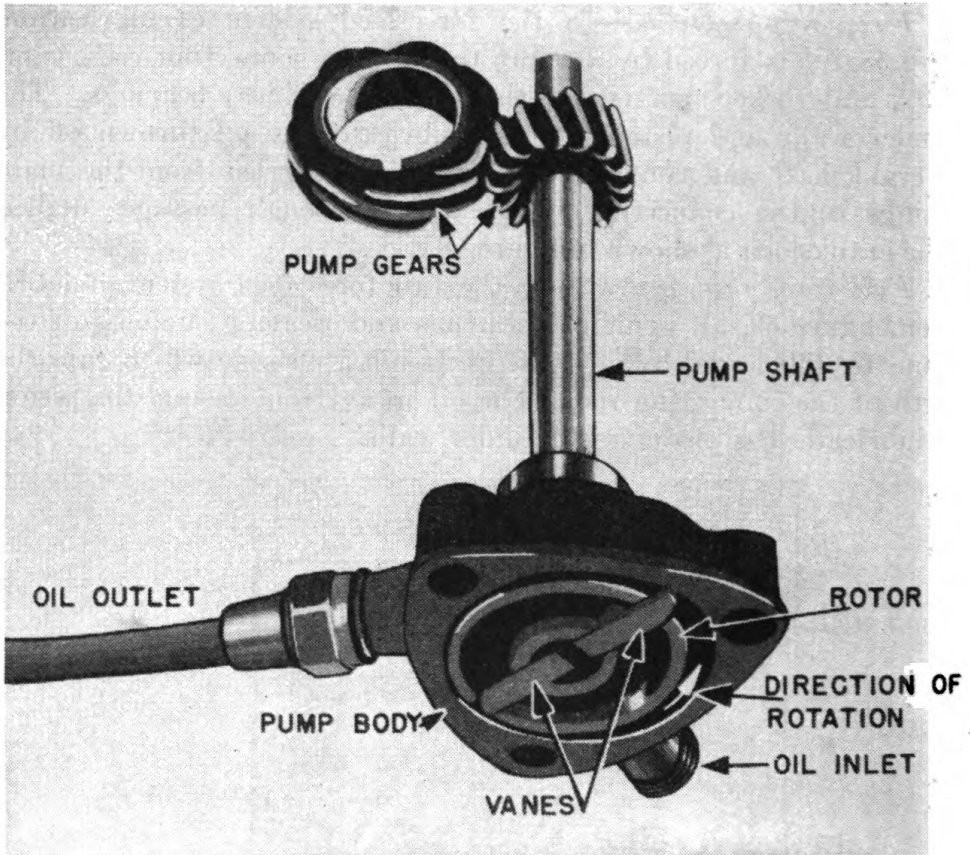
Vane type oil pump with cover removed and gear drive indicated.
